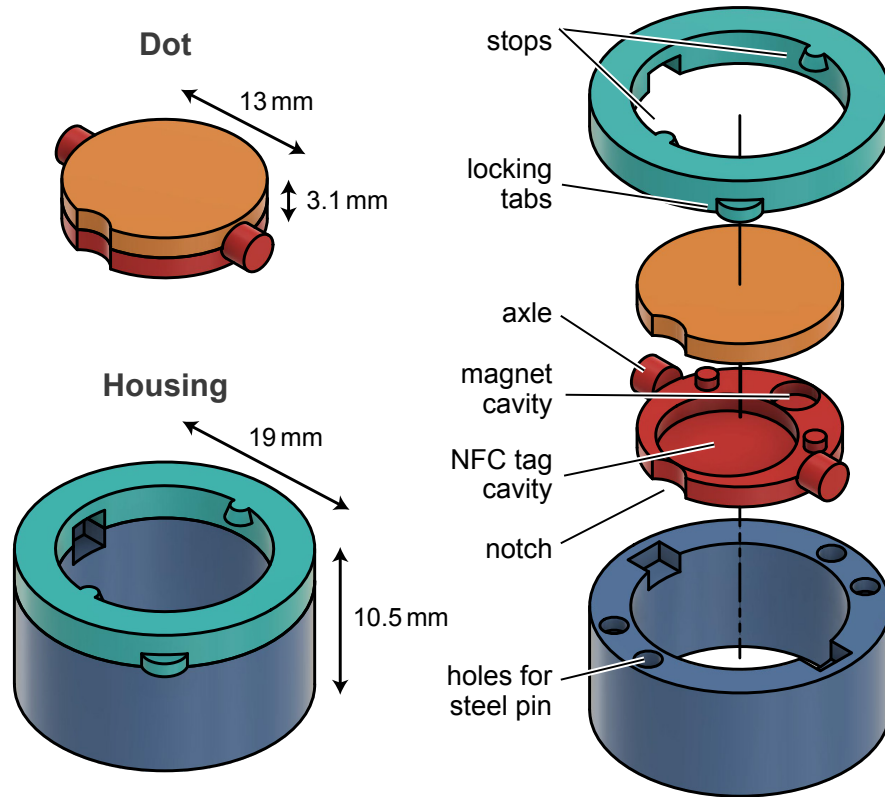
Exploded view of the flip dot pixel and shows the dimensions of the different components
